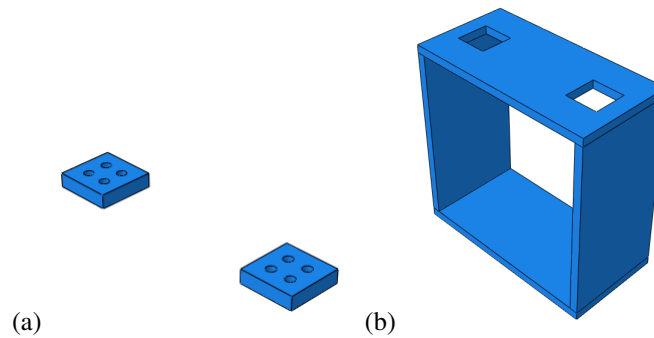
(a) Separate parts created for the contact region, which had a fine mesh so that the contact could be resolved. (b) Remaining part of the box assembly, which had a coarser mesh. The parts shown in (a) were connected to the box using tie constraints.
